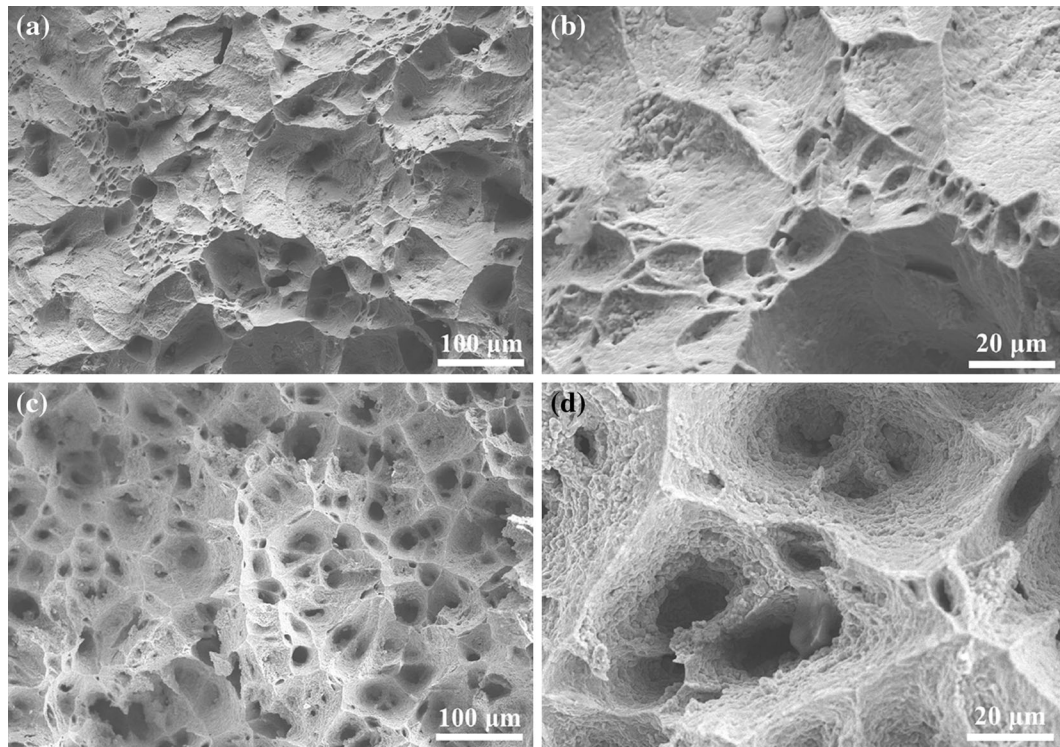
Fracture surfaces of specimens tested at 1273 K (1000 °C): (a) and (b) 160 μm, (c) and (d) 37 μm.
